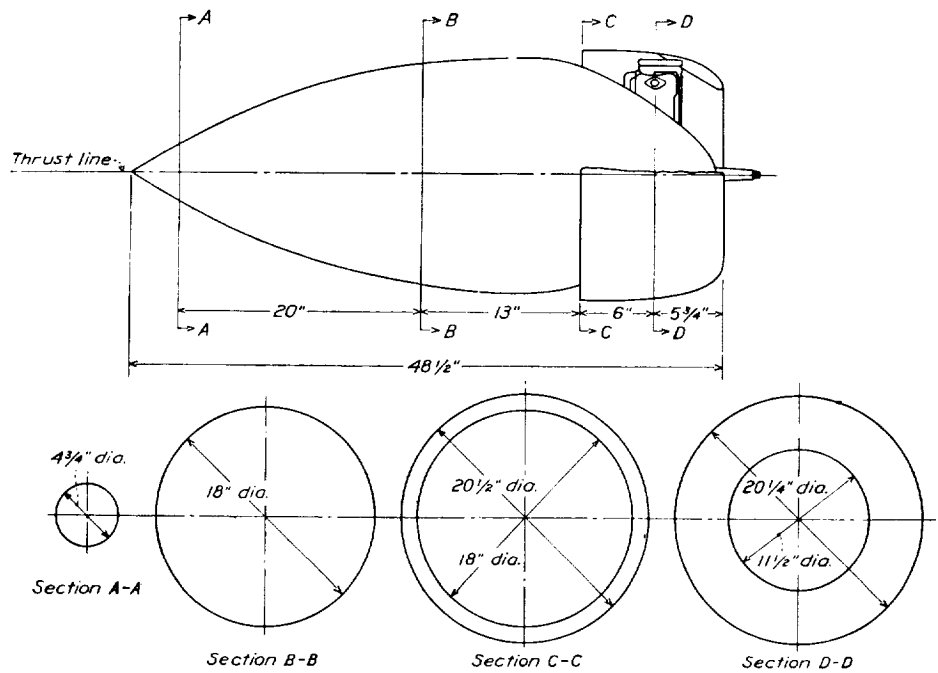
The N. A. C. A. cowled nacelle and engine assembly.
